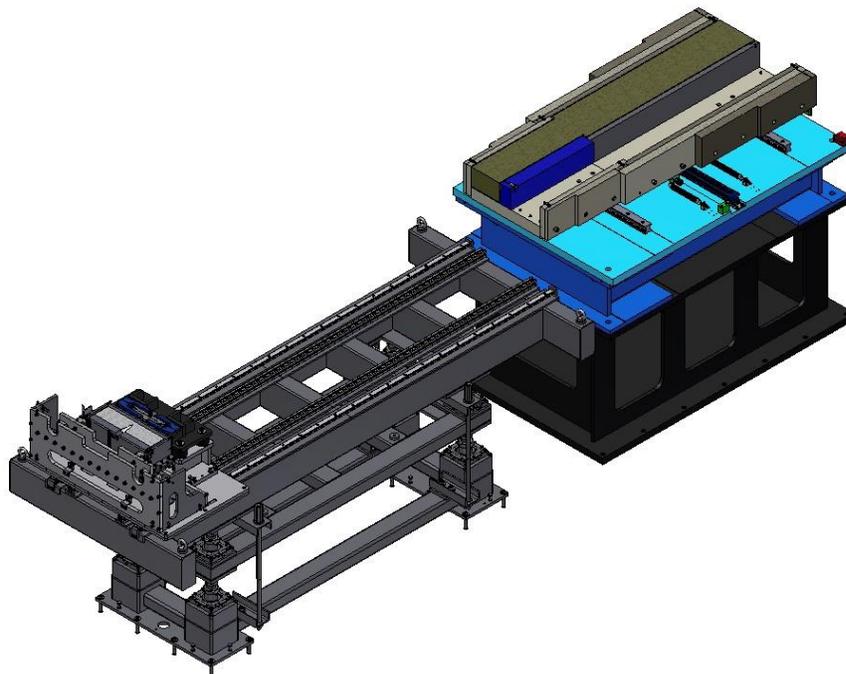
Aerial view of test beamline components with horizontal sectioning plane at beam axis height.
